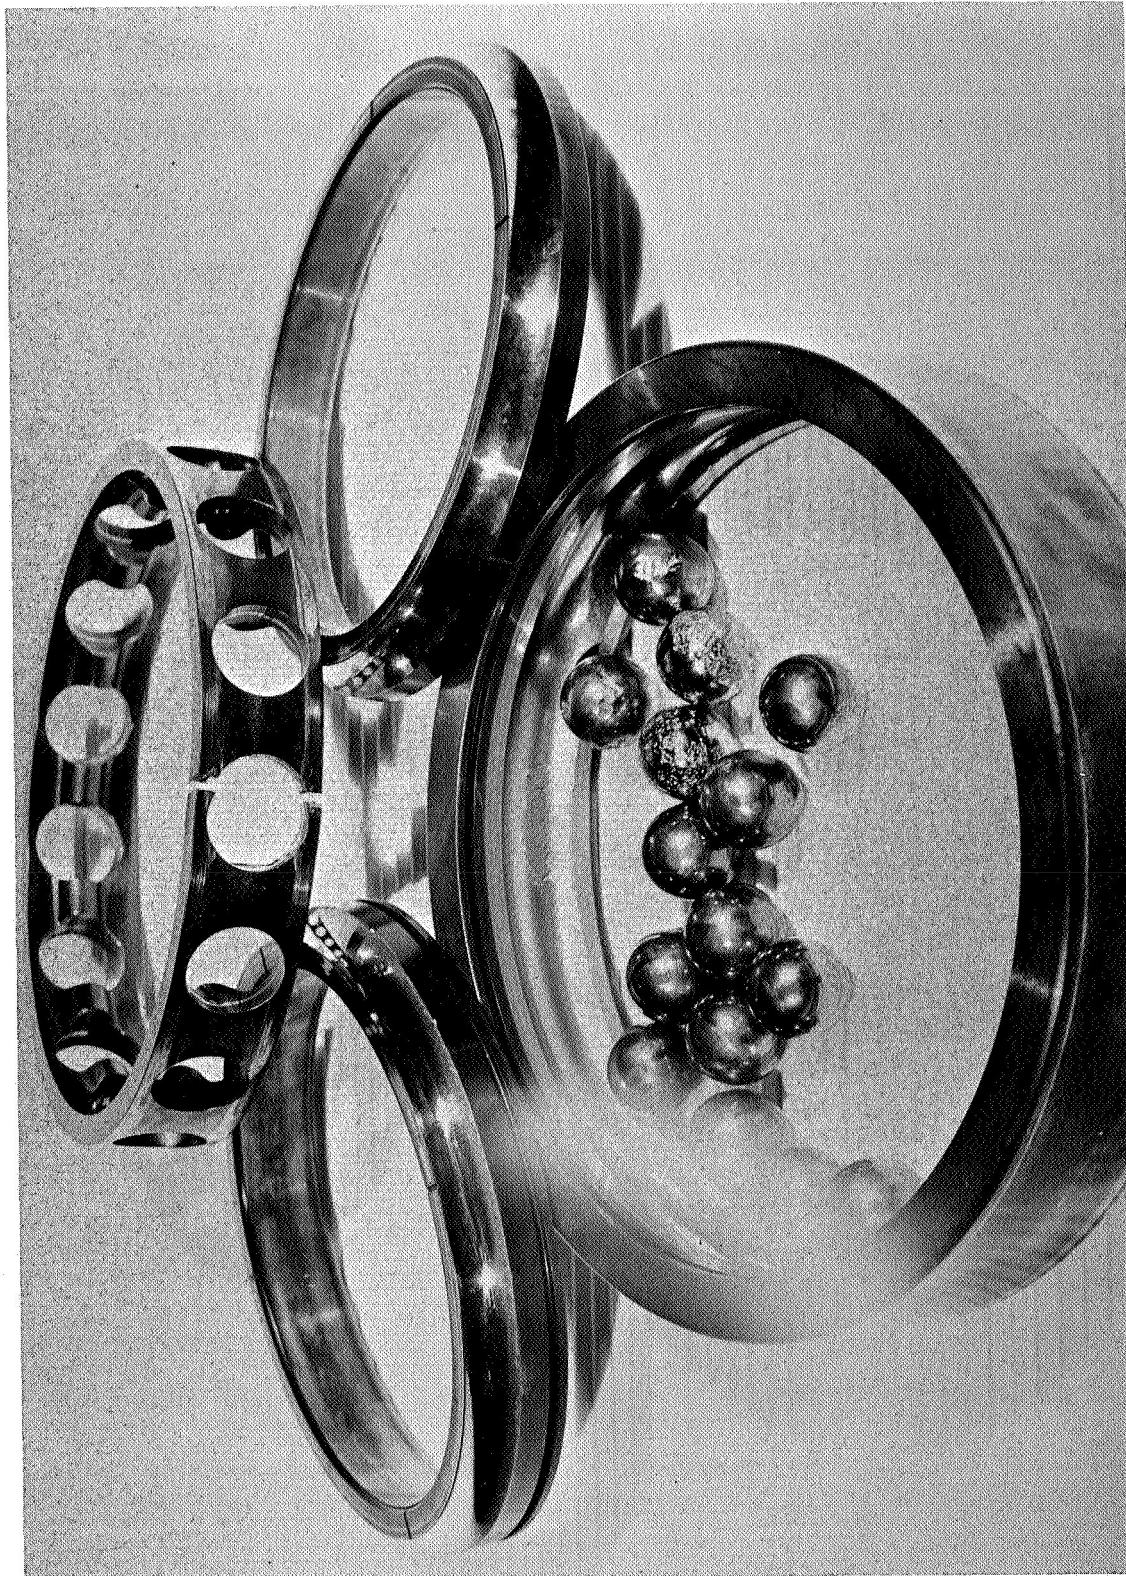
OVERALL VIEW OF BEARING S/N 17 AFTER 349 HOURS
